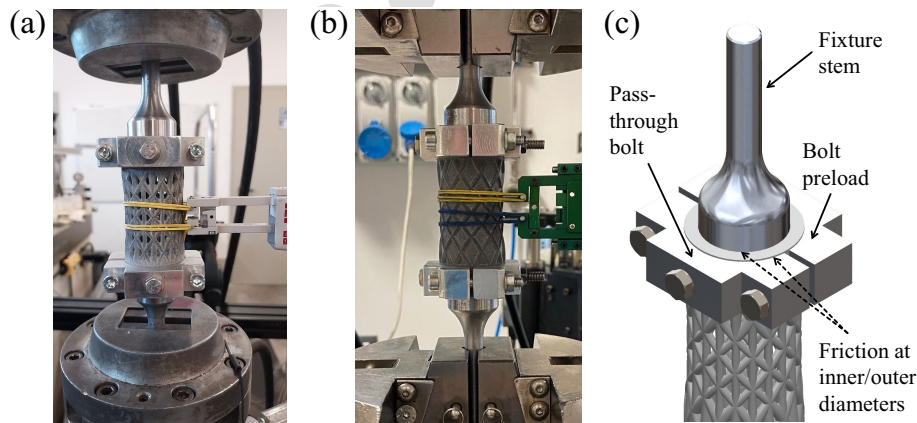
(a) Tensile test on T specimen, (b) tensile test on S specimen and (c) design of the clamping system to perform tensile tests.
